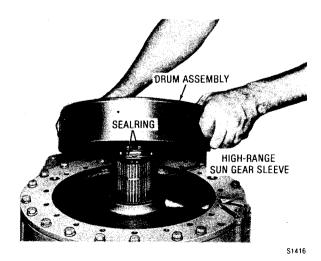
Installing low-range clutch drum assembly (TRT-1)
